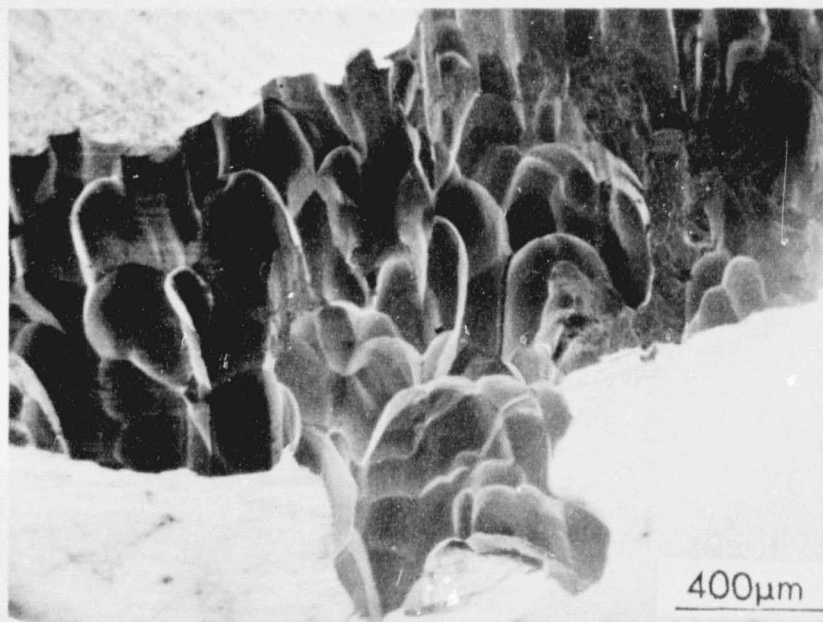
Fracture Surfaces of Longitudinal Shear Test Specimens of γ - γ' Alloy 20 Tested at 1100 °C
